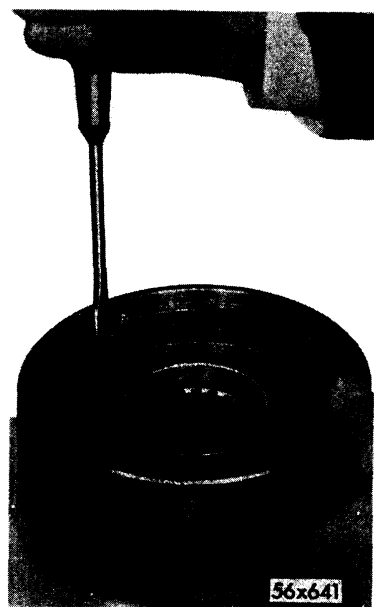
Removal and Installation of Rear Clutch Piston Retainer Snap Ring
